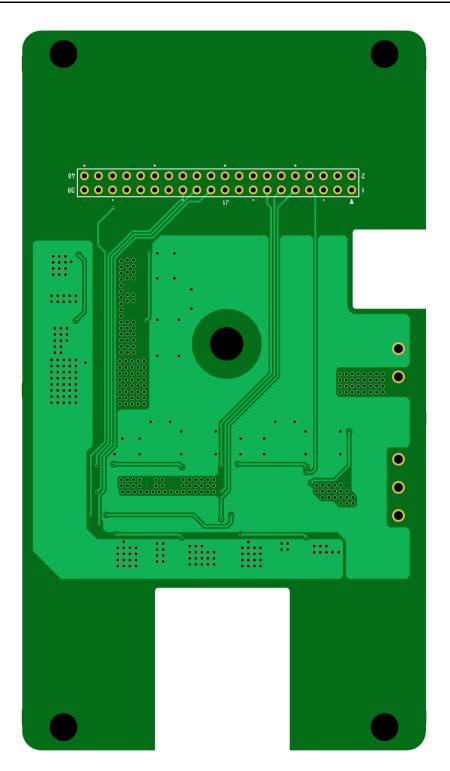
External Inverter Board Layout Motor Driving Circuit for Automotive Body Electronics Using SmartMCD (Bottom Surface)
